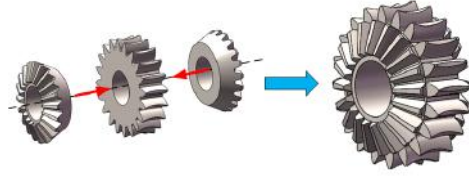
Formation process of a bevel-worm gear. This special shaped gear is made by metal printing.
